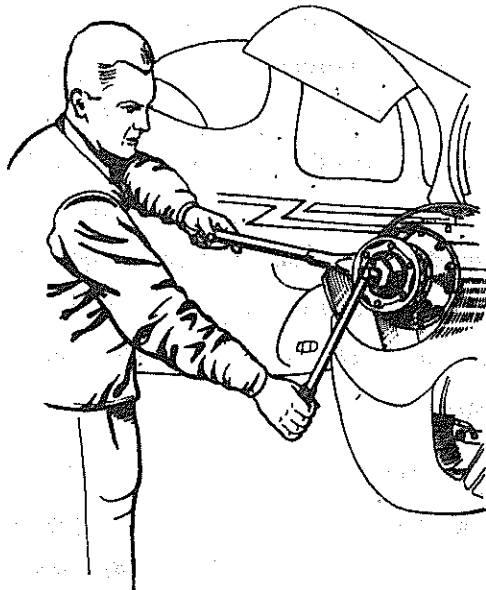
Proper dismounting of the power oil distributor rotor from the engine crankshaft
